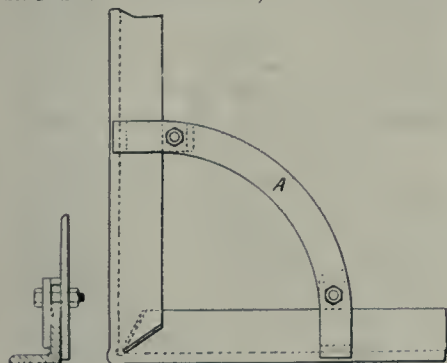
SECURING ANGLE TO BE WELDED.
